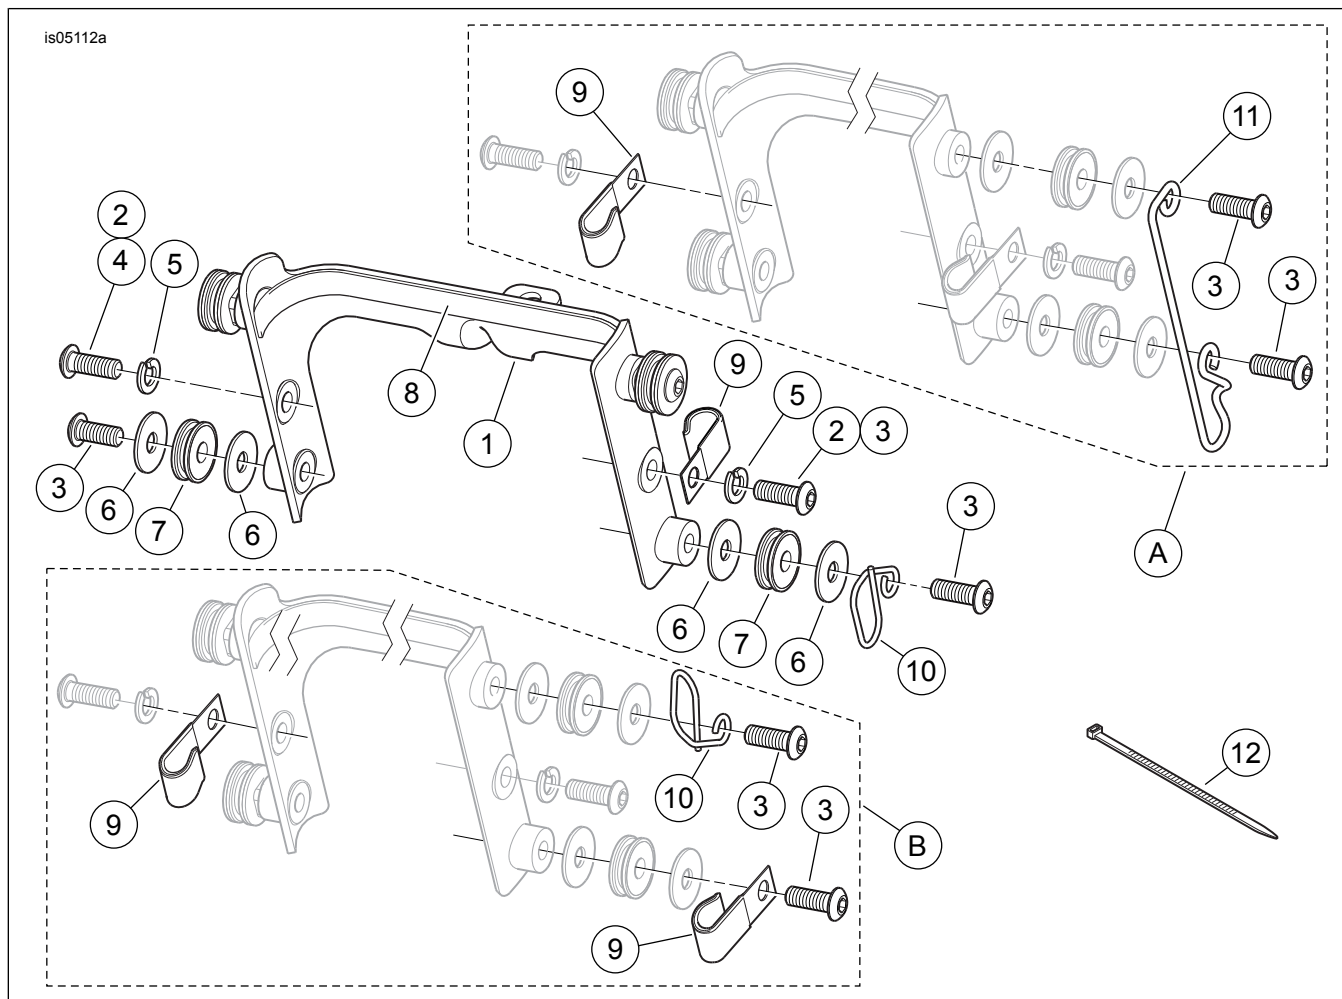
Service Parts: Detachable Windshield Docking Hardware Kit
